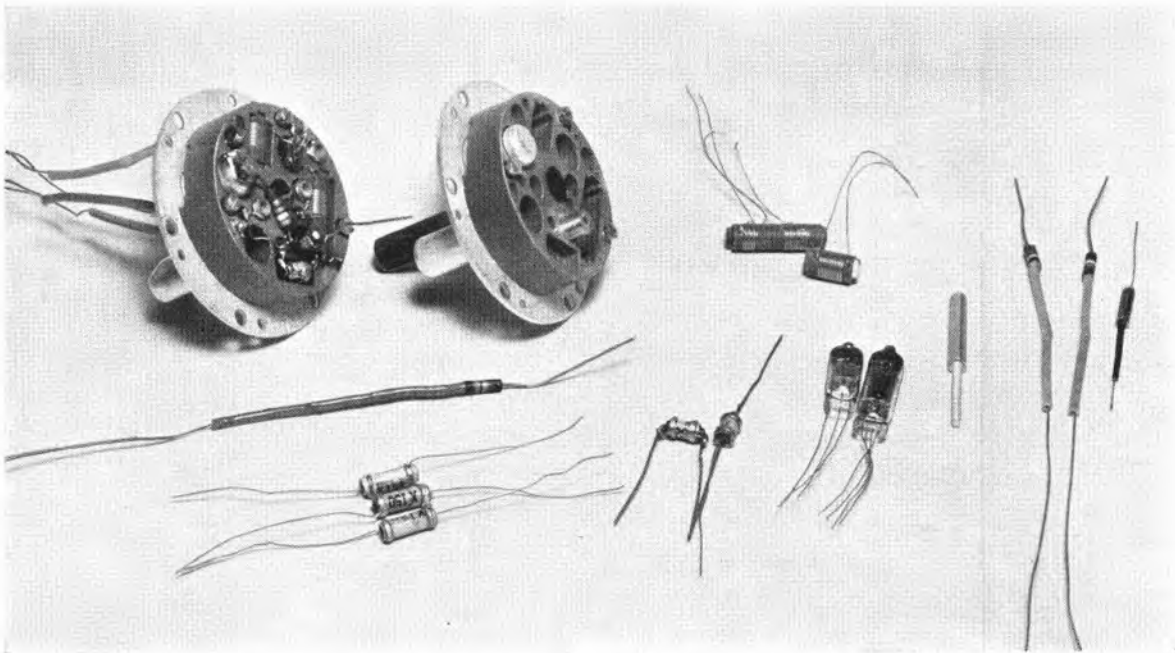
Oscillator assembly using thermosetting plastic block.
